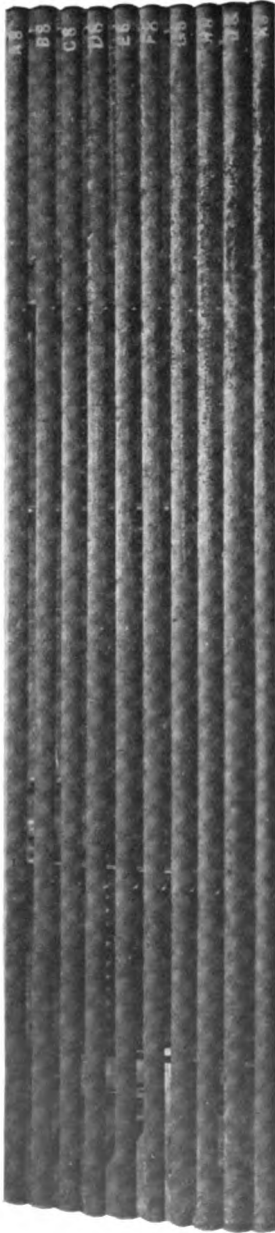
APPEARANCE OF TUBES, BOILER No. 4084, AFTER DISMANTLING. VERTICAL ROW, EIGHTH FROM RIGHT SIDE OF BOILER
